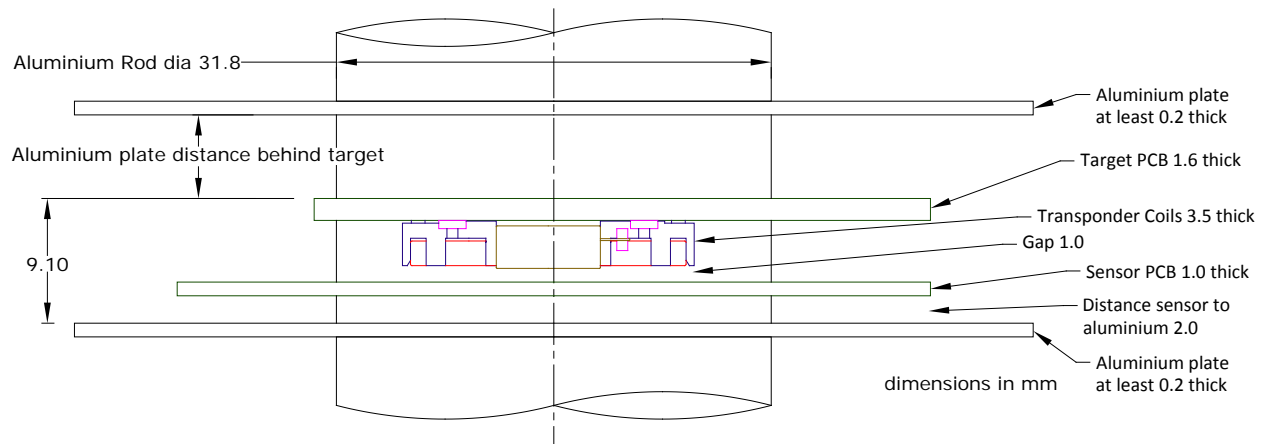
Between Aluminium Plates, Sensor 2mm Above Aluminium, With Rod Through Centre
